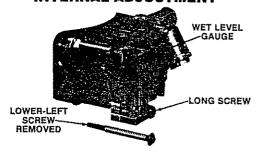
MODEL 2300 CHECKING FUEL LEVEL WITH KENT-MOORE GAUGE
